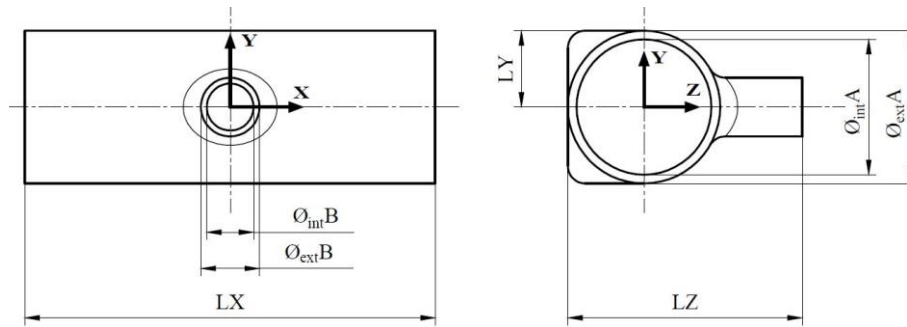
Drawing of geometry 1 and conventional name of the main dimensions investigated. Same convention is adopted for geometry 2.
